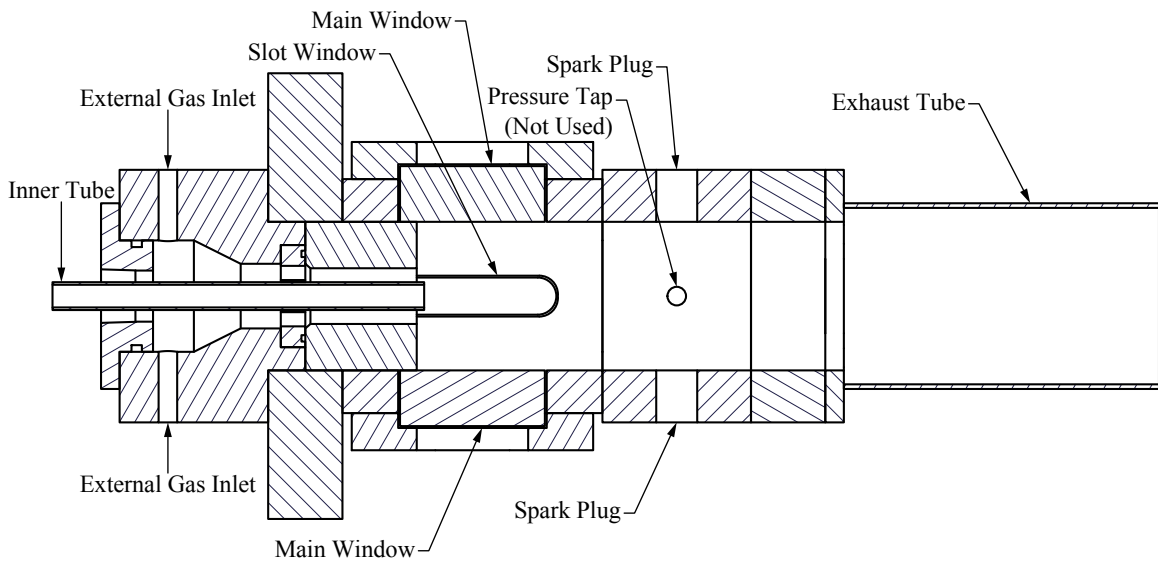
Cross-sectional view of the enclosed co-flow burner.
